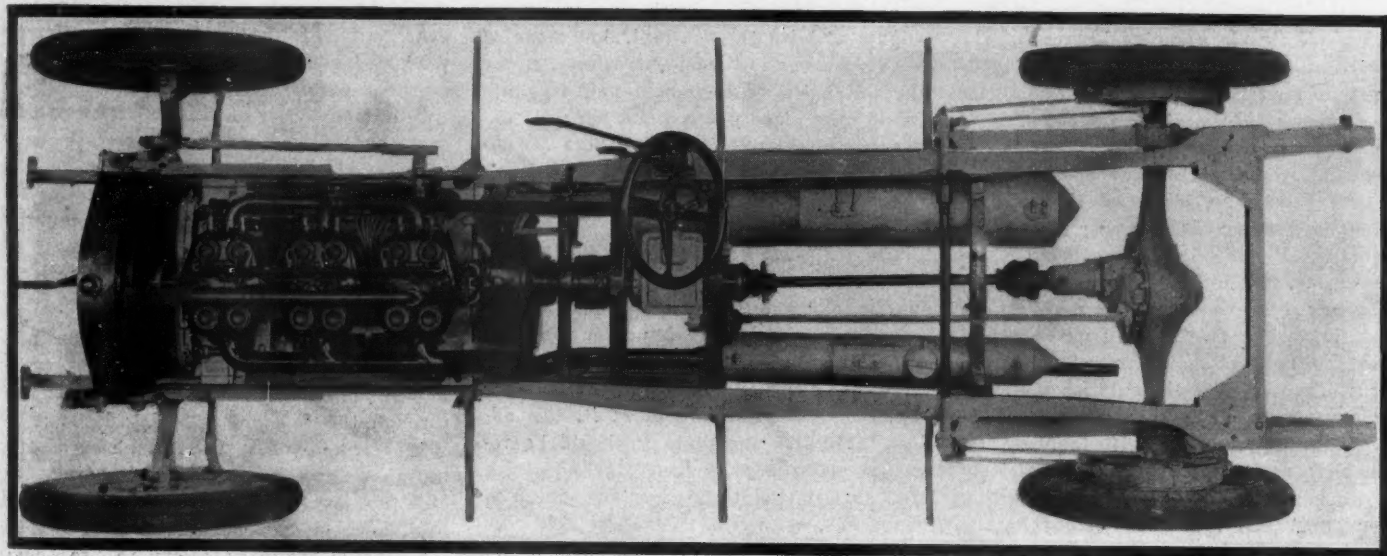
1912 THOMAS CHASSIS WITH CYLINDRICAL GASOLINE AND OIL TANKS UNDER REAR OF CHASSIS
